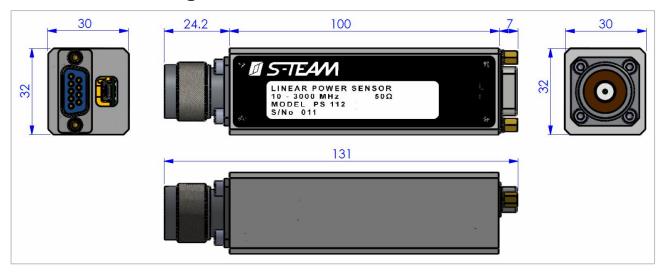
Basic PS112 dimensions. All dimensions are in millimeters.
